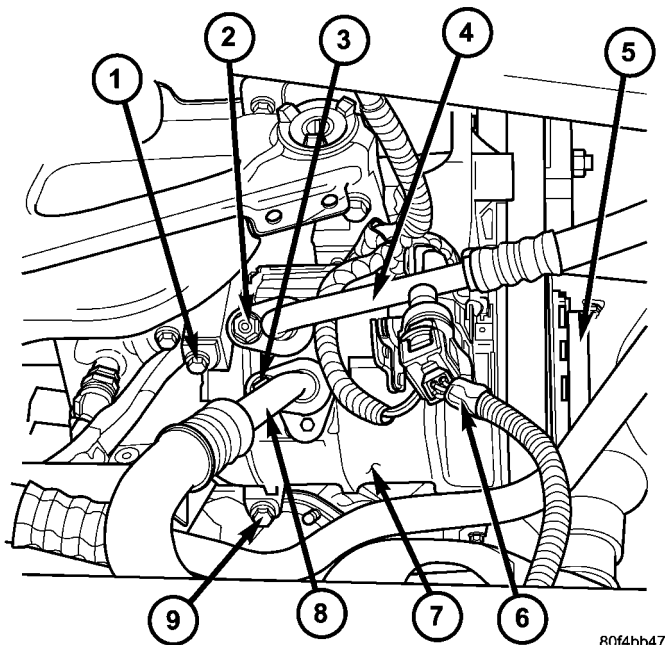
Compressor and Lines – 2.4L Shown, 4.0L Typical
